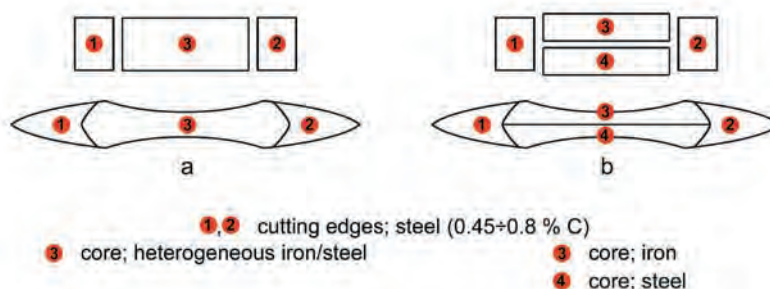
Stará Kourim. Two possible methods of welding semi-finished pieces together to make Blade H55. Drawing J. Hošek
